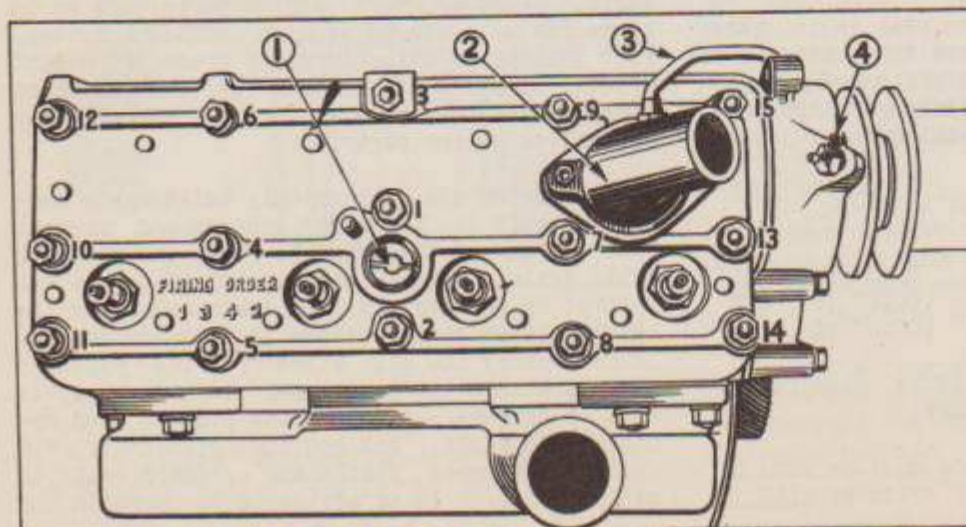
SEQUENCE FOR TIGHTENING CYLINDER HEAD BOLTS
